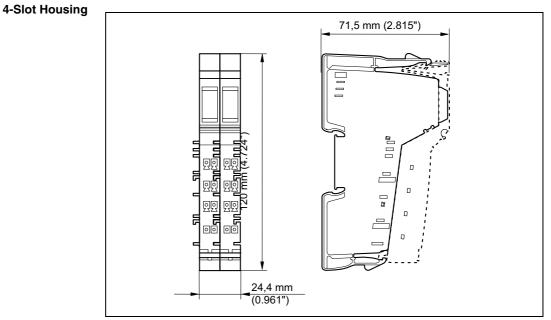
Dimensions of the electronic sockets (4-slot housing)
